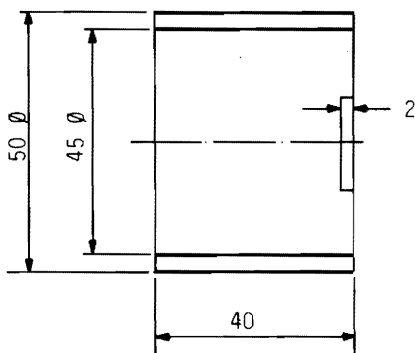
The Shaft Sleeve, the Journal Component, Showing Nominal Dimensions, mm.
